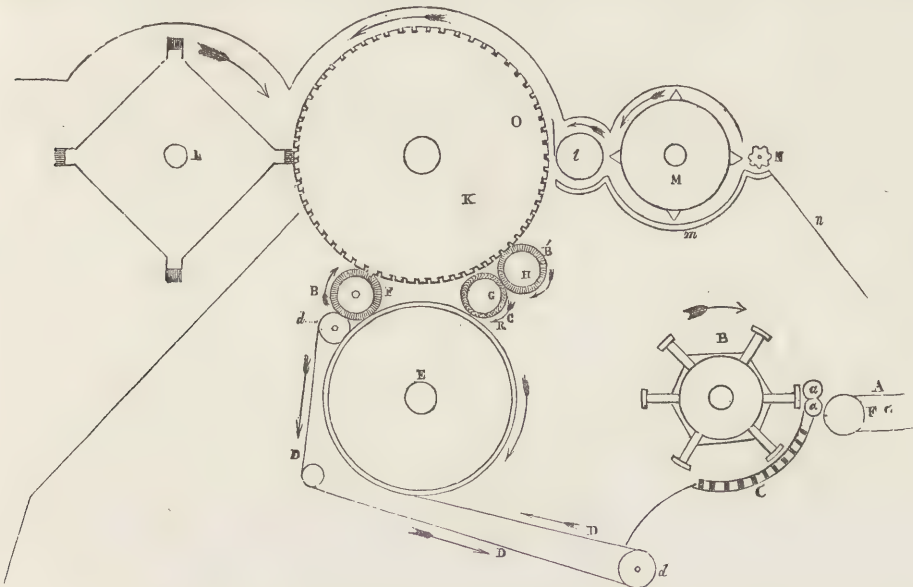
WOOL-PICKING AND CLEANING MACHINE.
